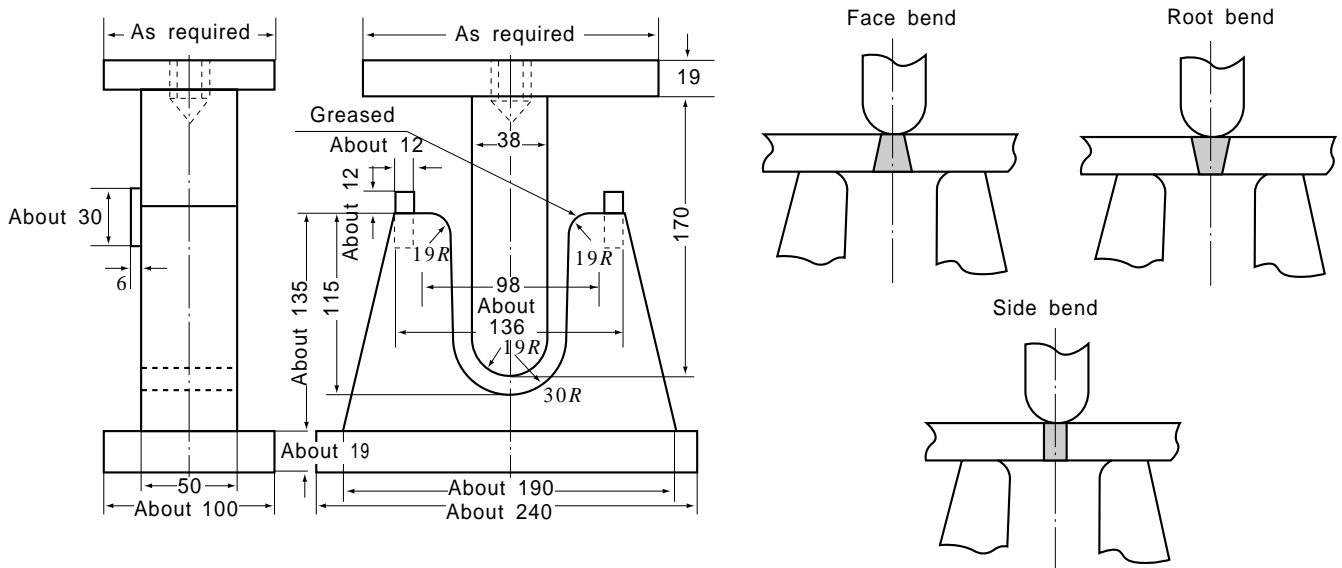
Guided Bend Test Jig (For 9 mm in thick., Unit : mm)
